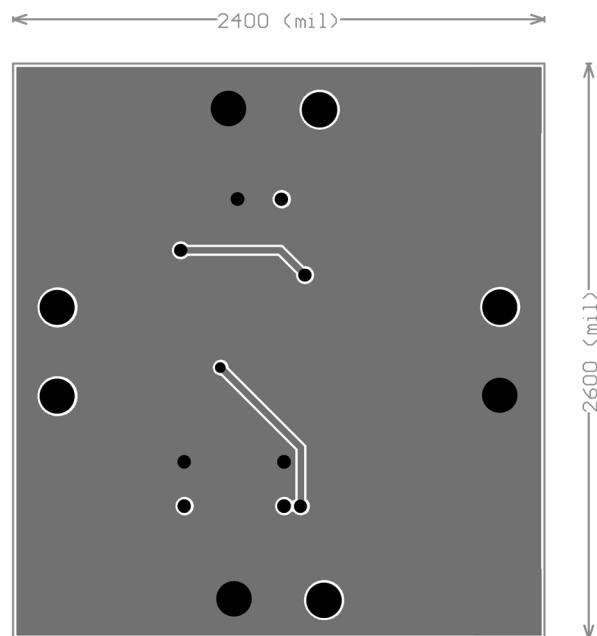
LM3477 Evaluation Board PCB Layout (Bottom Side)
